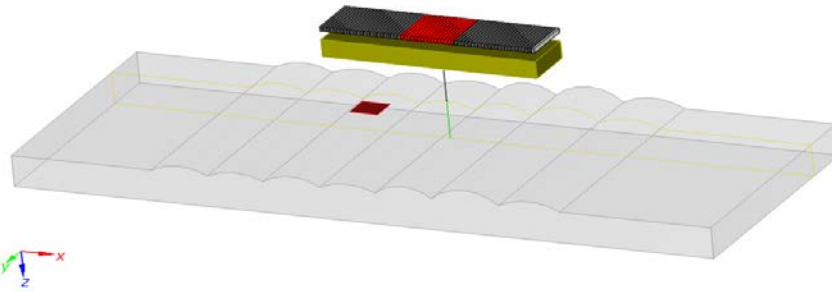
CIVA model of probe and piece with as-welded surface containing a laminar defect
